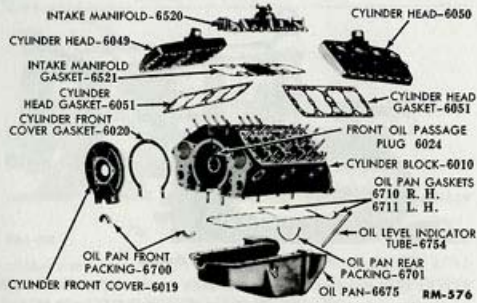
Cylinder Block, Heads, Intake Manifold, Oil Pan, Front Cover and Seals, and Oil Level Gauge Tube
